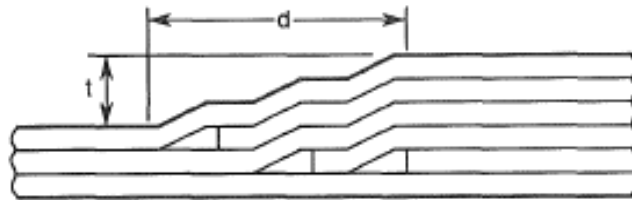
A Typical Cross Section of a Drop-off [12]
